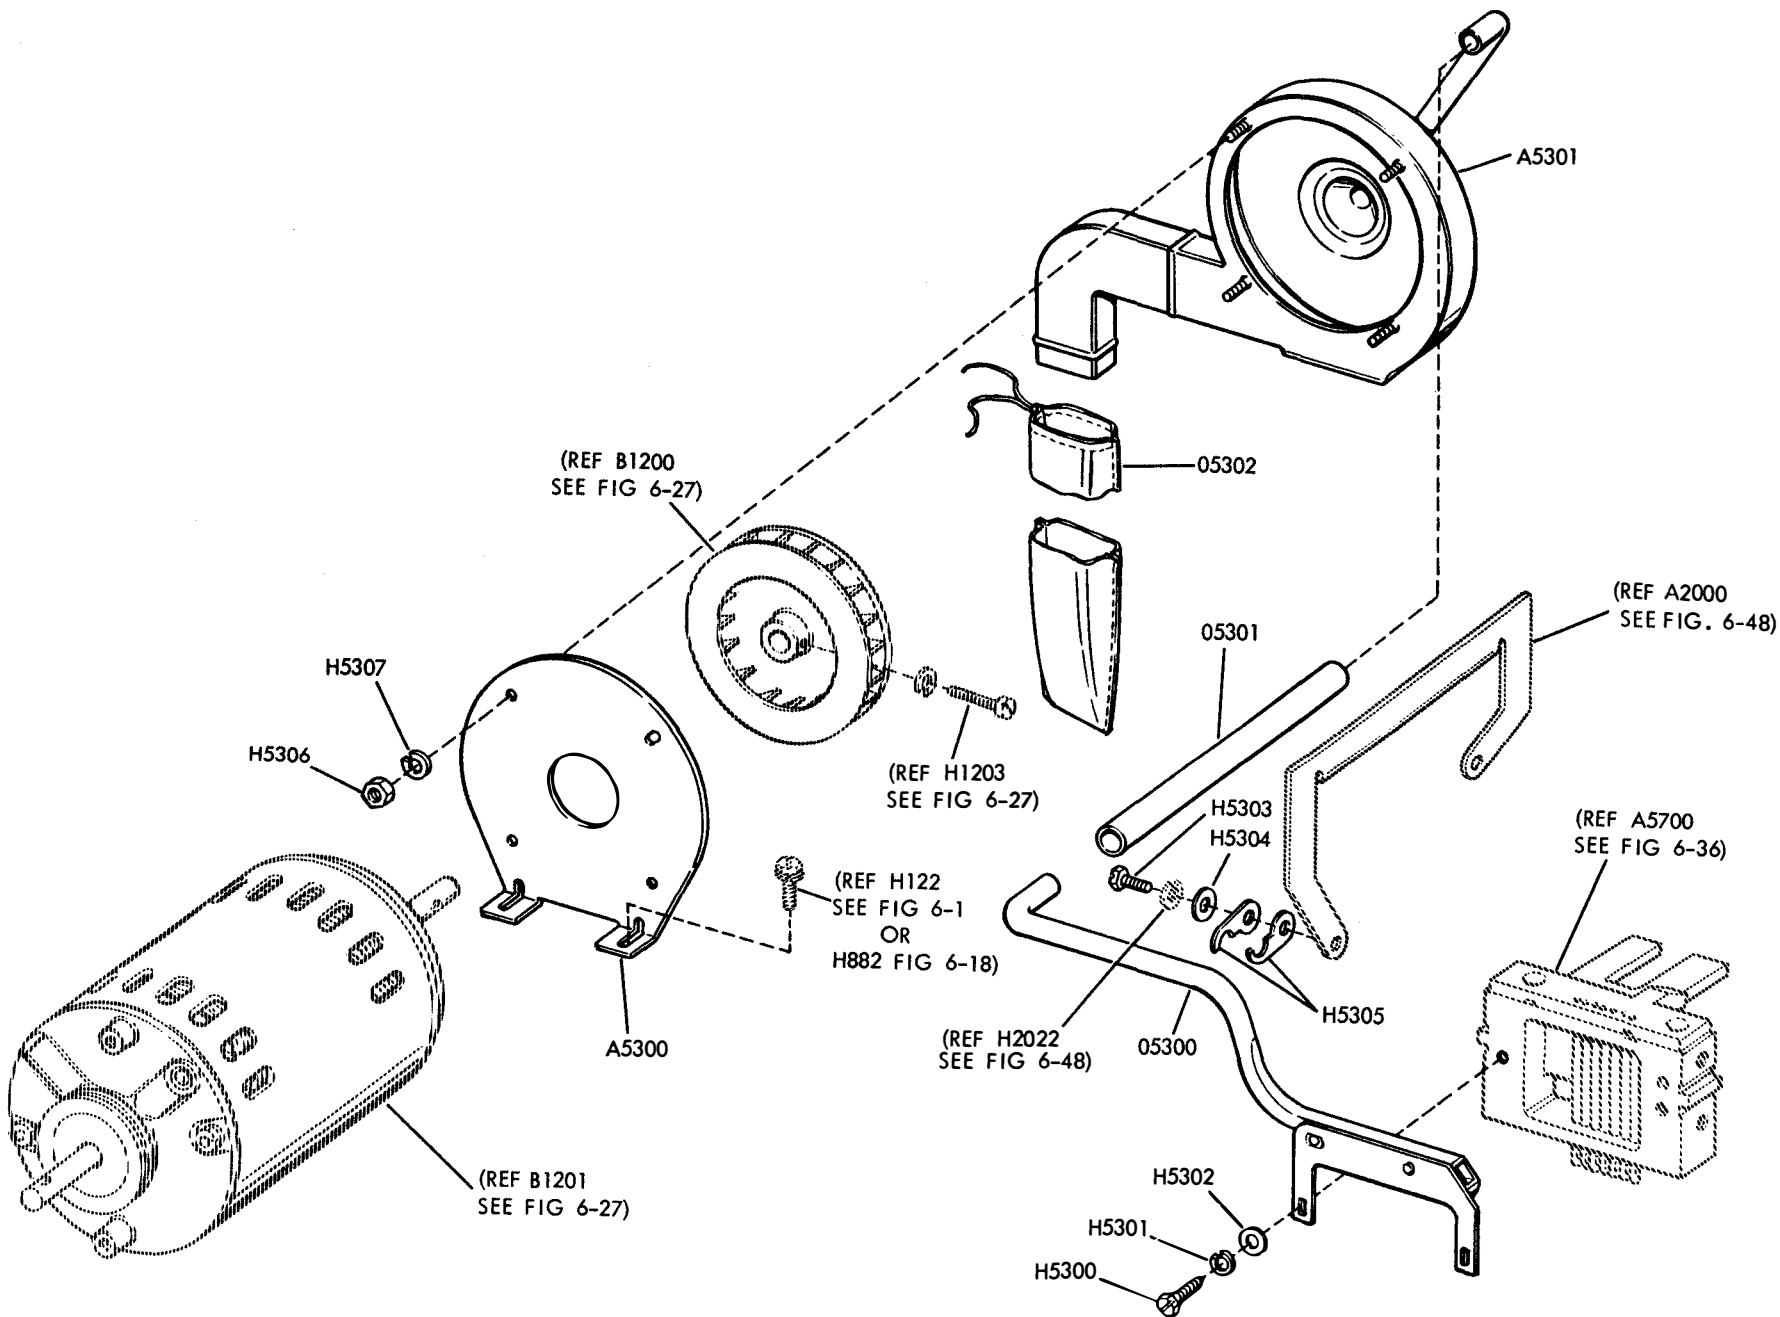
Vacuum Chad Disposal Mechanism (TT-253A/UG)
